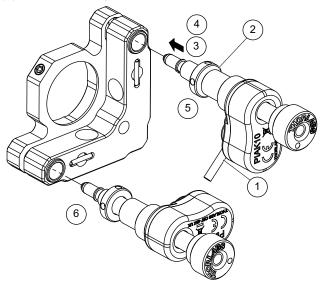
Fitting the PIA10K to a KM100 Mirror Mount
